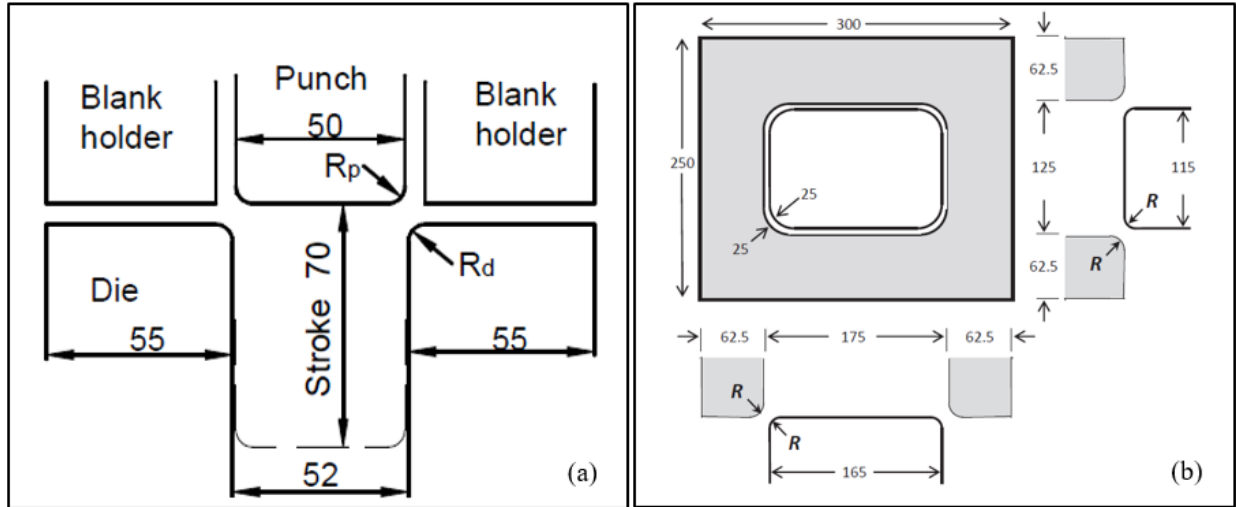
Schematic of the tool setup for springback measurement in (a) Numisheet 93 (b) Numisheet 2014
